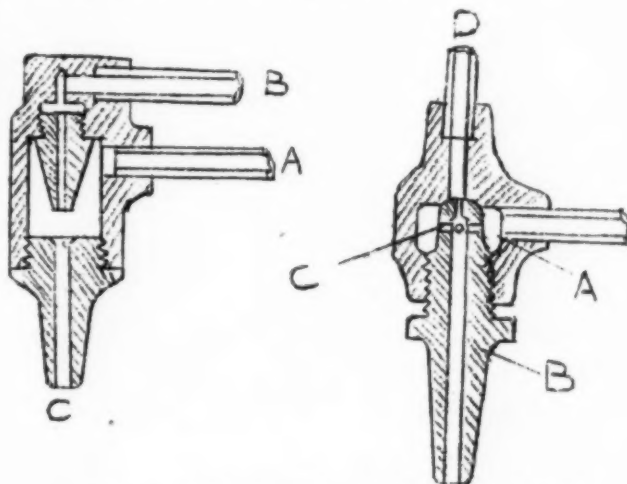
OXY-ACETYLENE WELDING SYSTEM.
